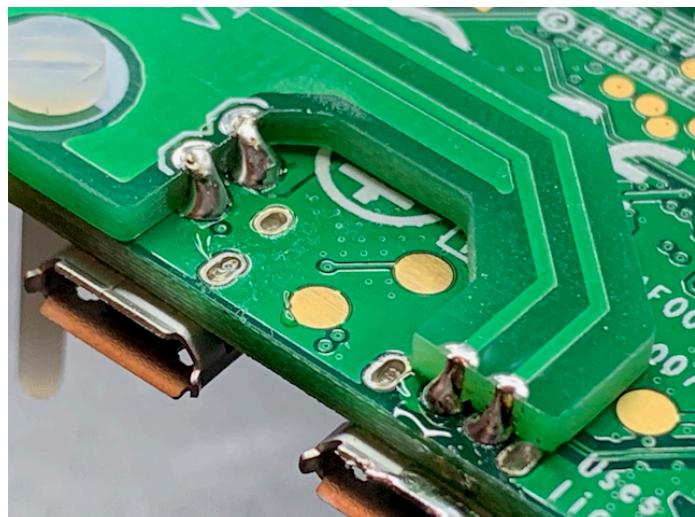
USB Stem PCB soldered to the Raspberry Pi Zero
